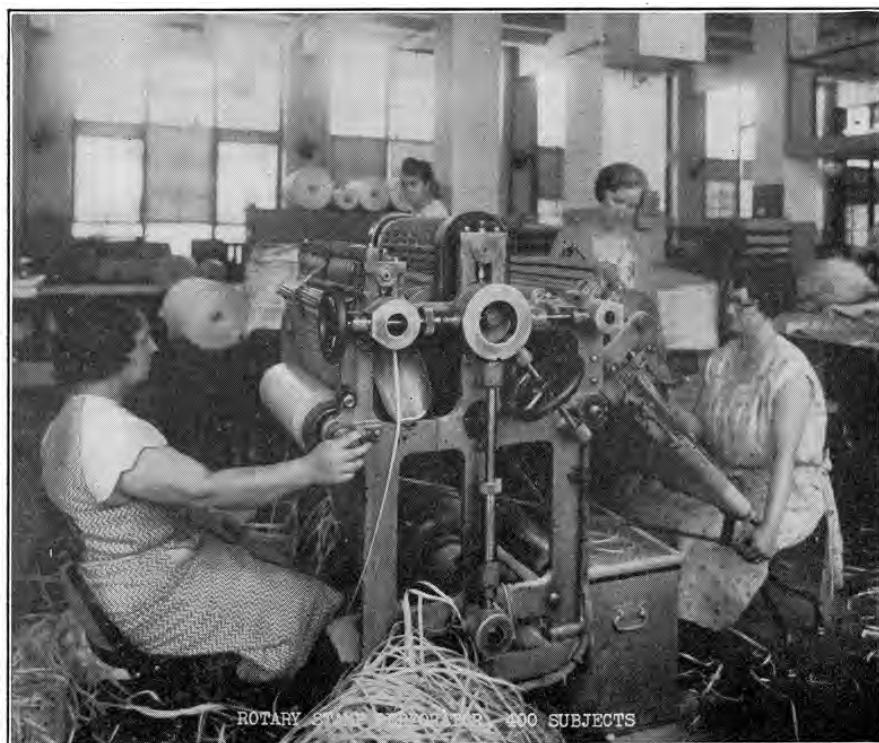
MANUALLY OPERATED PERFORATING MACHINE.
